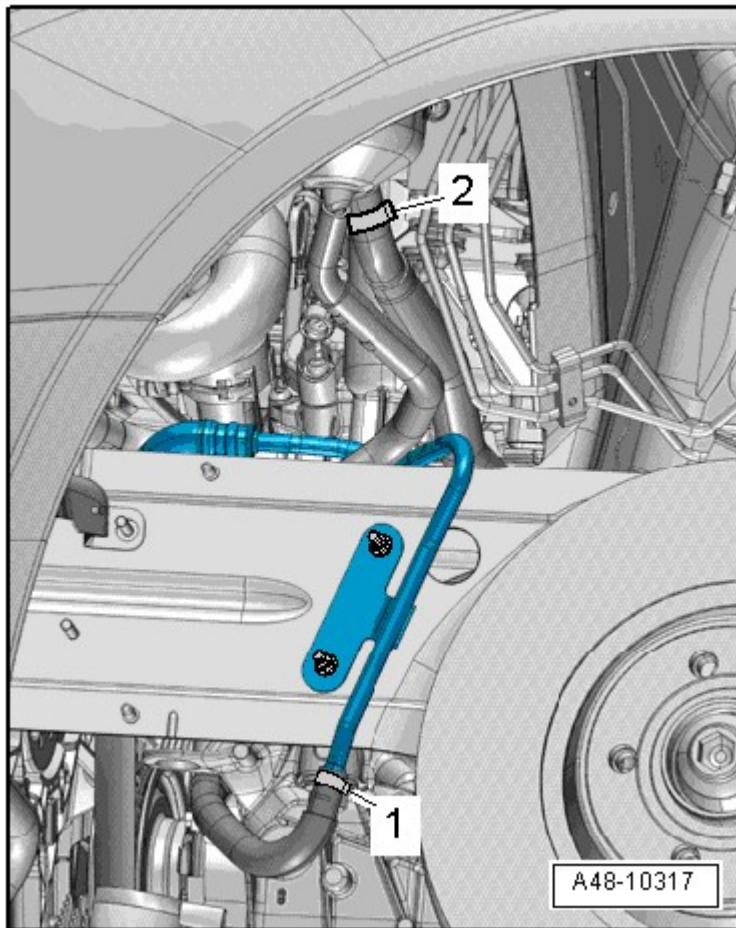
Disconnecting Power Steering Hydraulic Oil Supply Line
